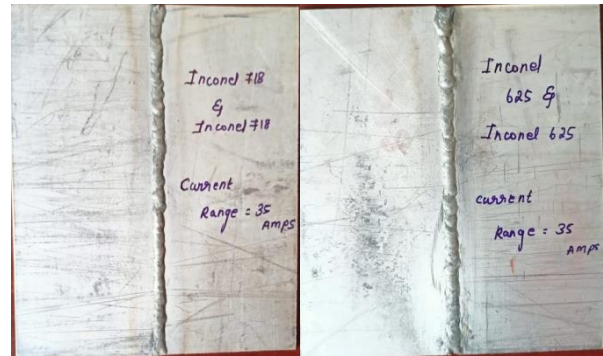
Welded sample of A. Inconel 625 & B. Inconel 718
